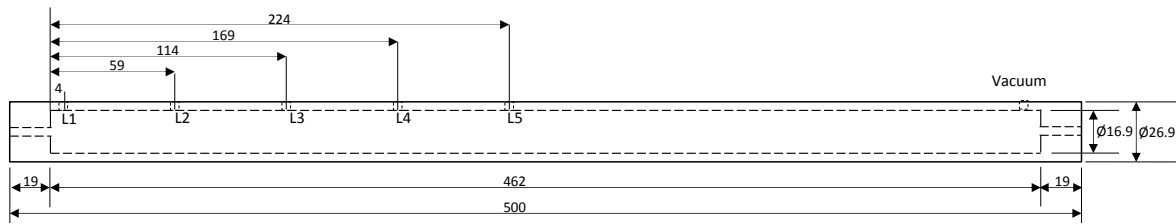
Drawing of the 3/4" tube of the test set-up (dimensions in mm).
